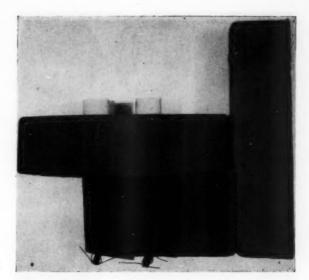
Core assembly for testing green sand 1-1/8-in. diam by 2-in. test cores.
